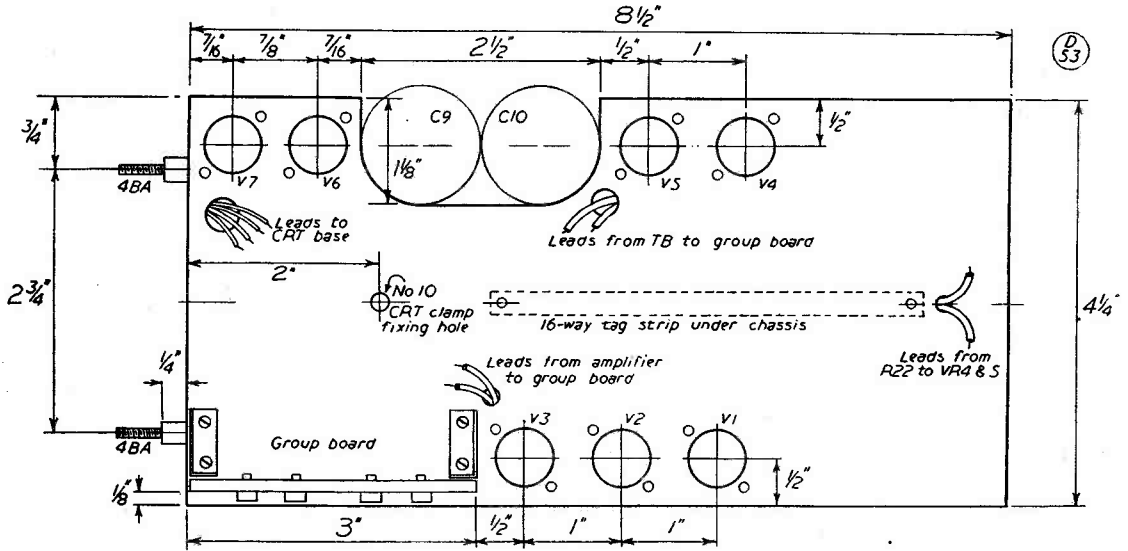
Plan view of the chassis cut-out for the Miniature Oscilloscope described by G3FLP. A few non-critical dimensions are not given as they may depend upon parts actually used and small changes in the general layout. The side and rear aprons are 1-in. deep, and the front drop is 1 1/4-in. A photograph of the completed instrument appeared on p. 673 of the February issue.
